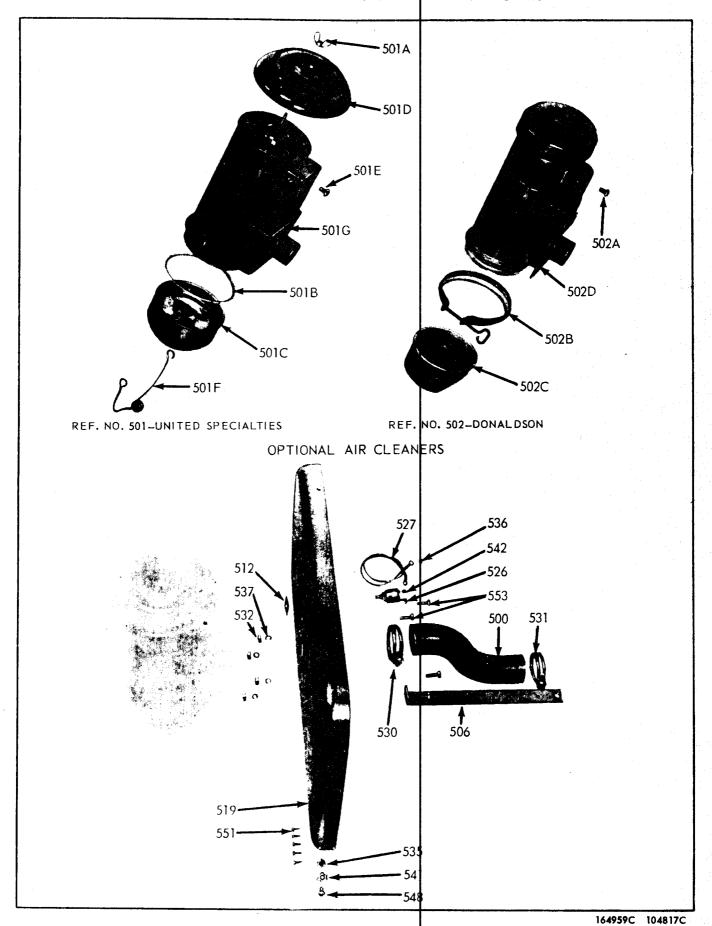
, END PANEL AND AIR CLEANER FOR ENGINE HOUSE WITH UNDERSLUNG FUEL TANK
